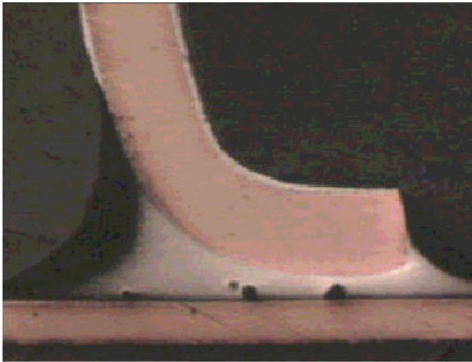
208L PQFP solder joint (Sn lead finish; SnAgCu solder paste with NiAu PCB surface finish).
